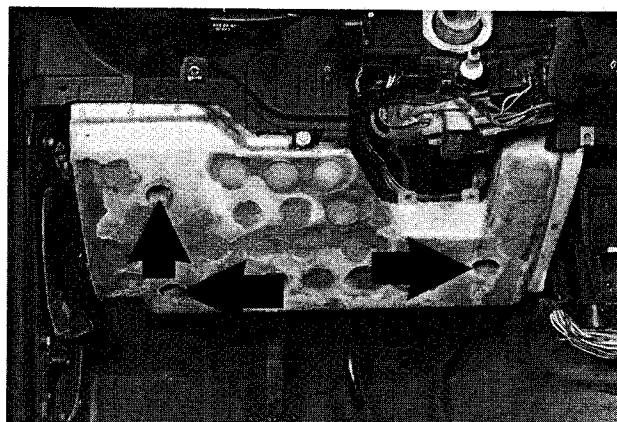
Driver side knee bolster mounting bolts (arrows).
